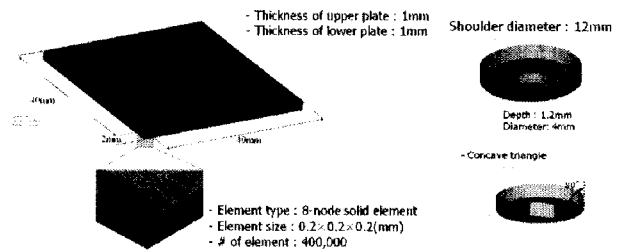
Dimension of sheets and pin geometries for FEM analysis with AA6022-T4
